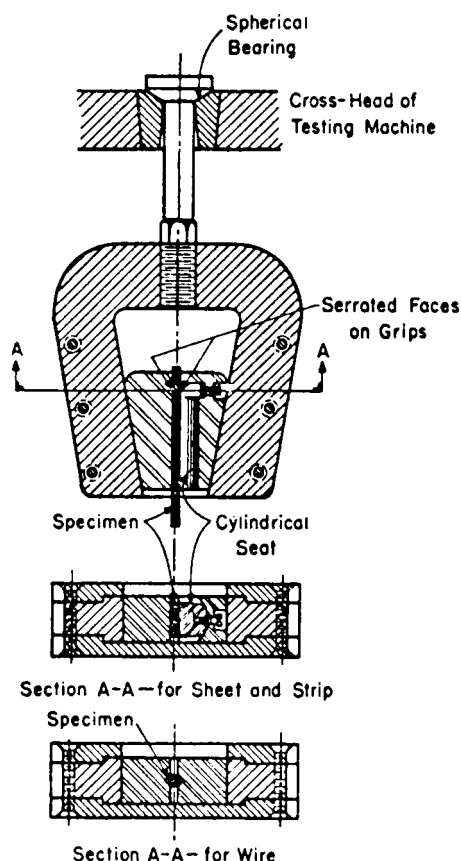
Gripping Devices for Sheet and Wire Specimens
